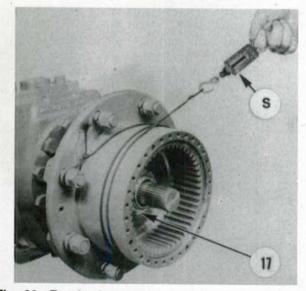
To check wheel hub bearing preload, use a spring scale (S) and cord to measure pull required to rotate hub; turn slotted nut (17) to adjust preload. Refer to text.
